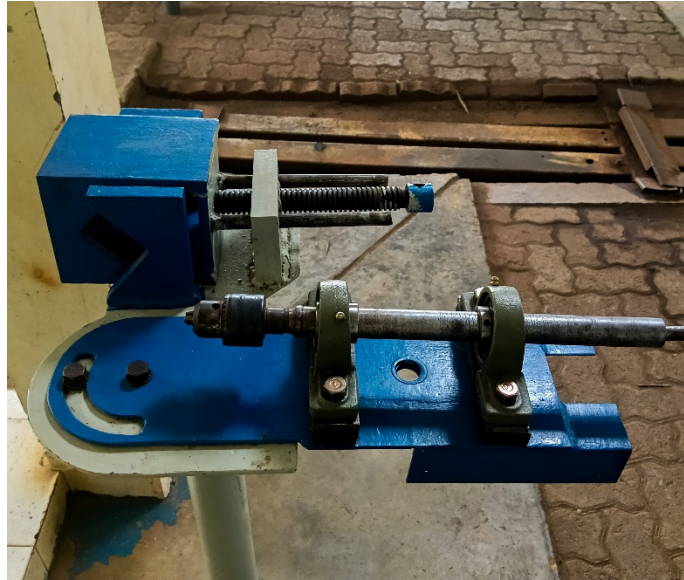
Pipe Notcher tool installed in the Welding Laboratory area.
